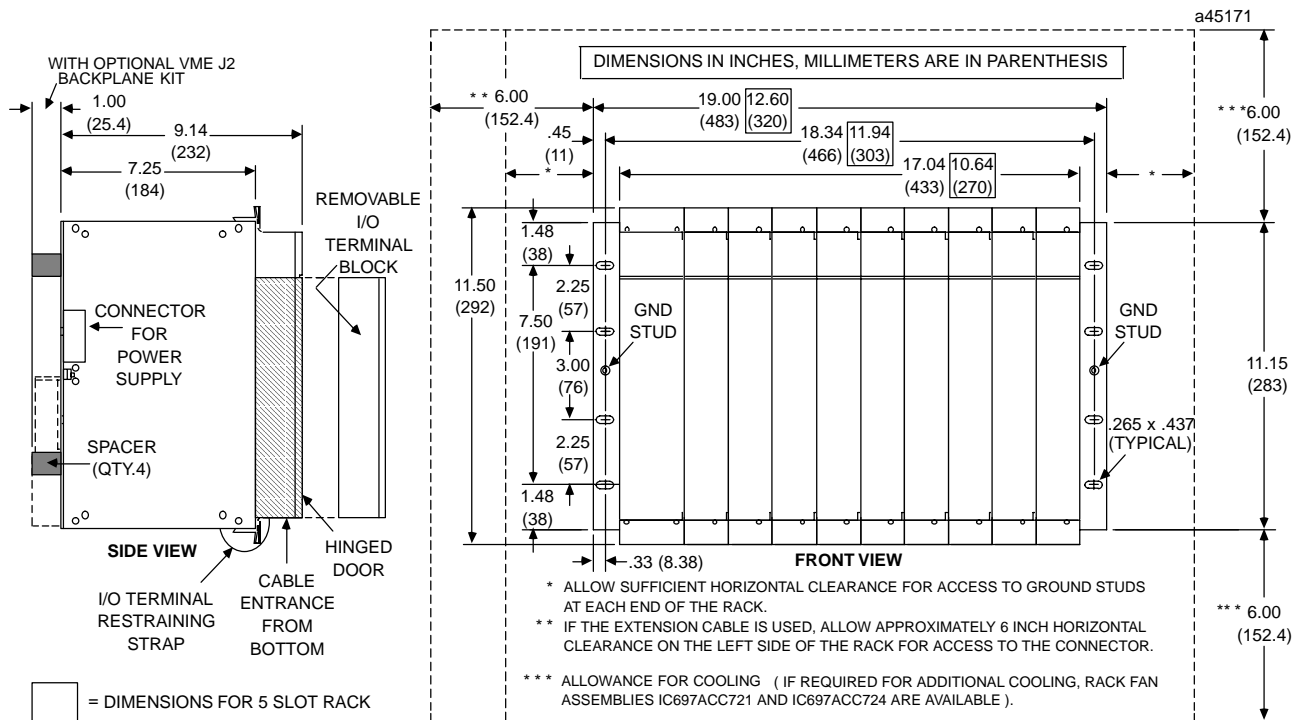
Standard Series 90-70 Rack Mounting Dimensions and Requirements for Standard Front (Rack) Mount Rack
